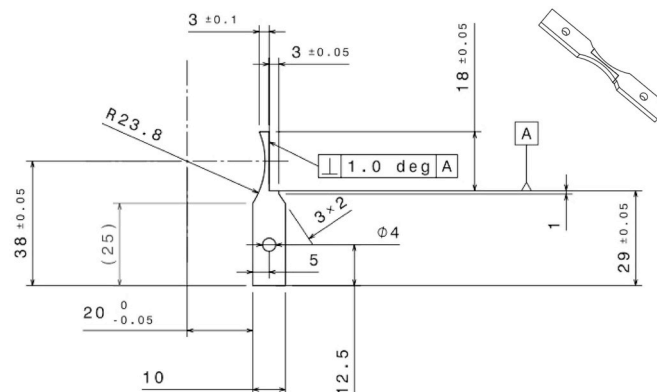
The suggested tensile-loaded fatigue test specimen designated as GE2.
